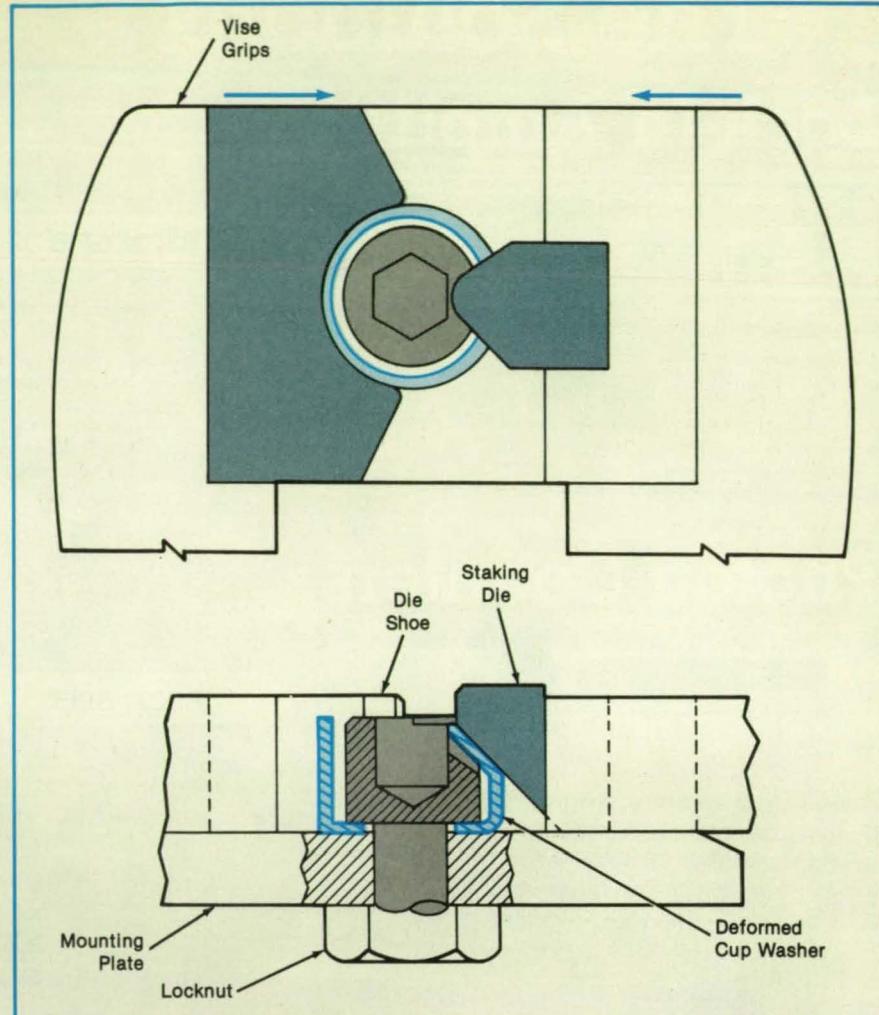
A Staking Die would form a dimple in the cup washer, causing the washer to grip the head of the screw.
